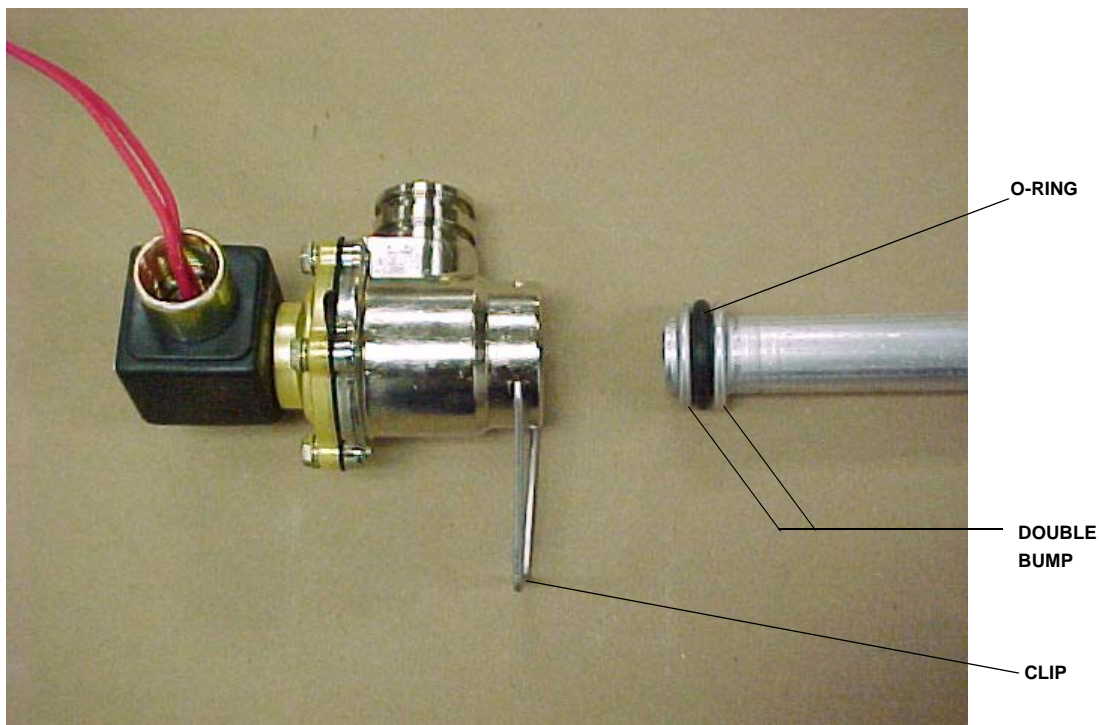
DOUBLE BUMP TUBE BETWEEN VALVE AND HOSE OUTLET. *Valve conduit not shown.
